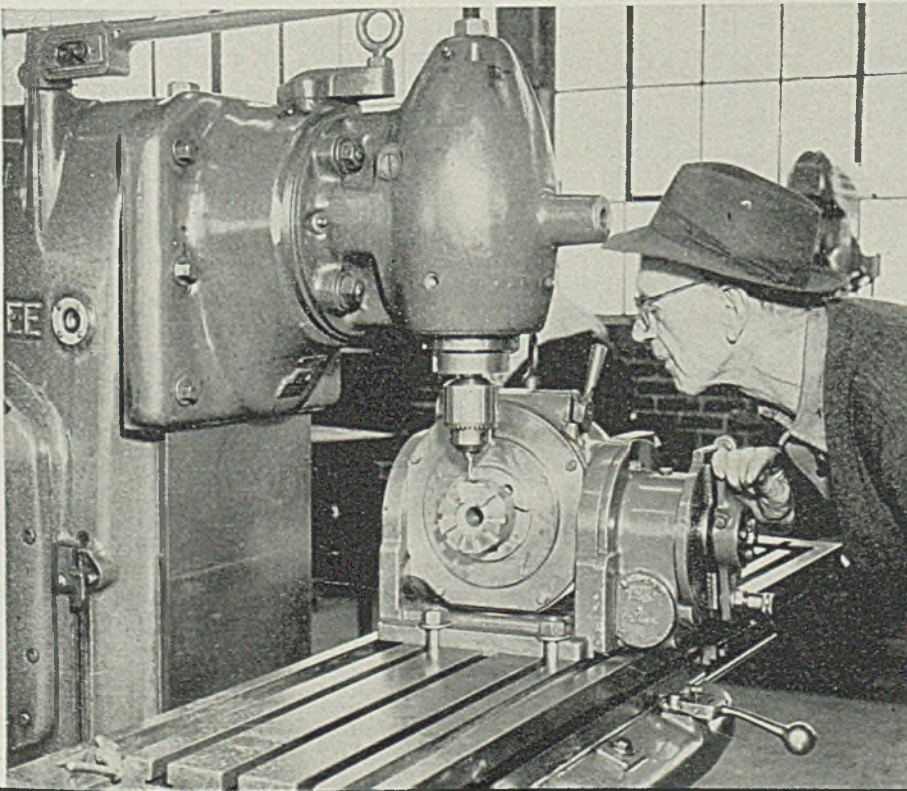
(Left, below)—Milling a spline gage in the tool room
